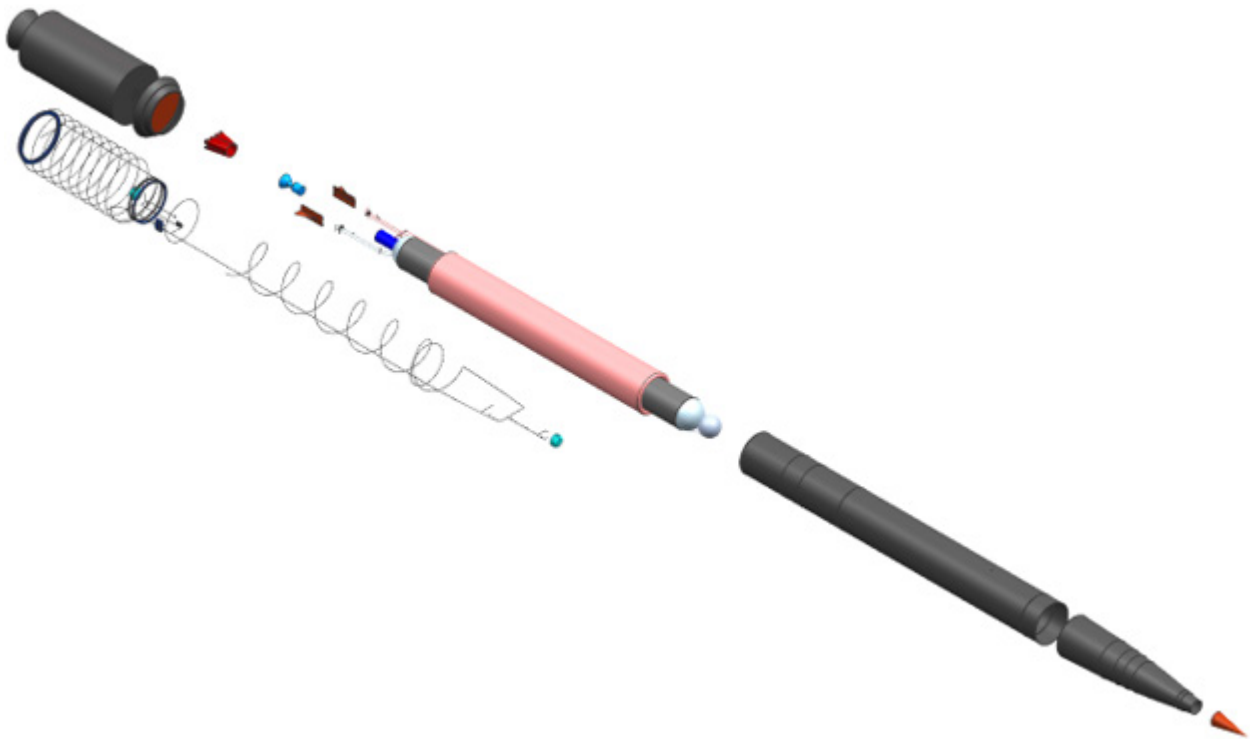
FREEDOM Exploded View (Not to Scale)
